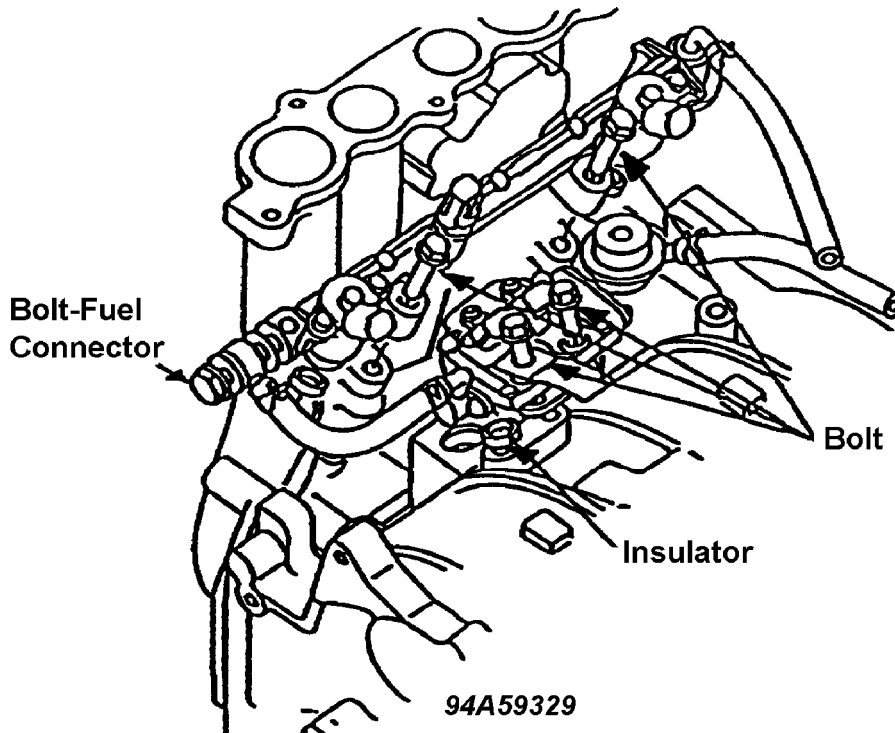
Removal of Primary & Secondary Fuel Distributor & Insulator
